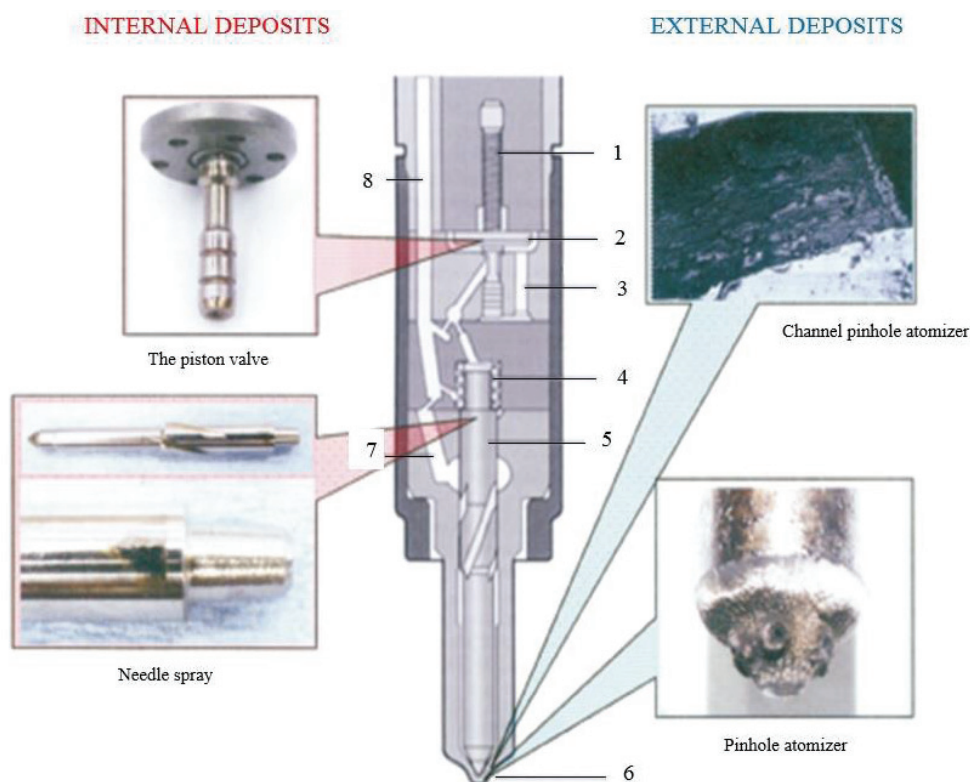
The cross-section of injector with area where deposits occur on external and internal areas [2]: 1 - spring solenoid valve; 2 - control valve; 3 - fuel drainage channel; 4 - fuel distribution control chamber; 5 - needle spray, 6 - hole spray; 7 - prechamber
